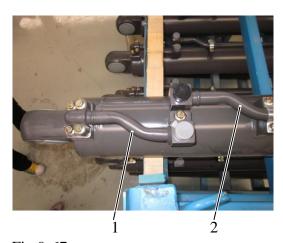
1 Boom cylinder piston-side steel pipe 2 Boom cylinder rod-side steel pipe
